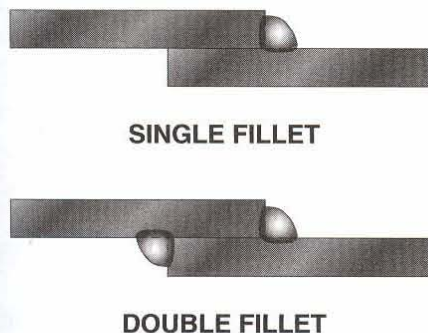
The single fillet and double fillet lap joints are the strongest weld joints available.
